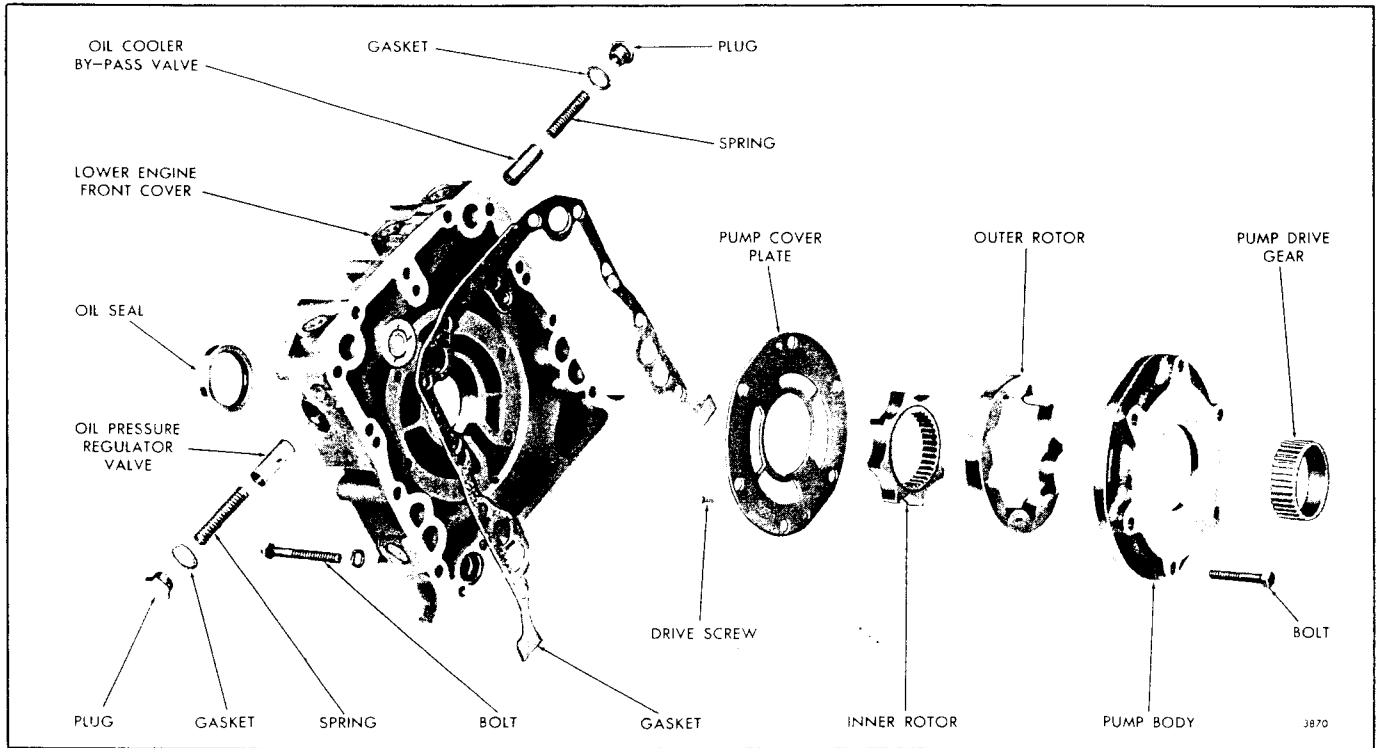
Lubricating Oil Pump Details and Relative Location of Parts (Current)
